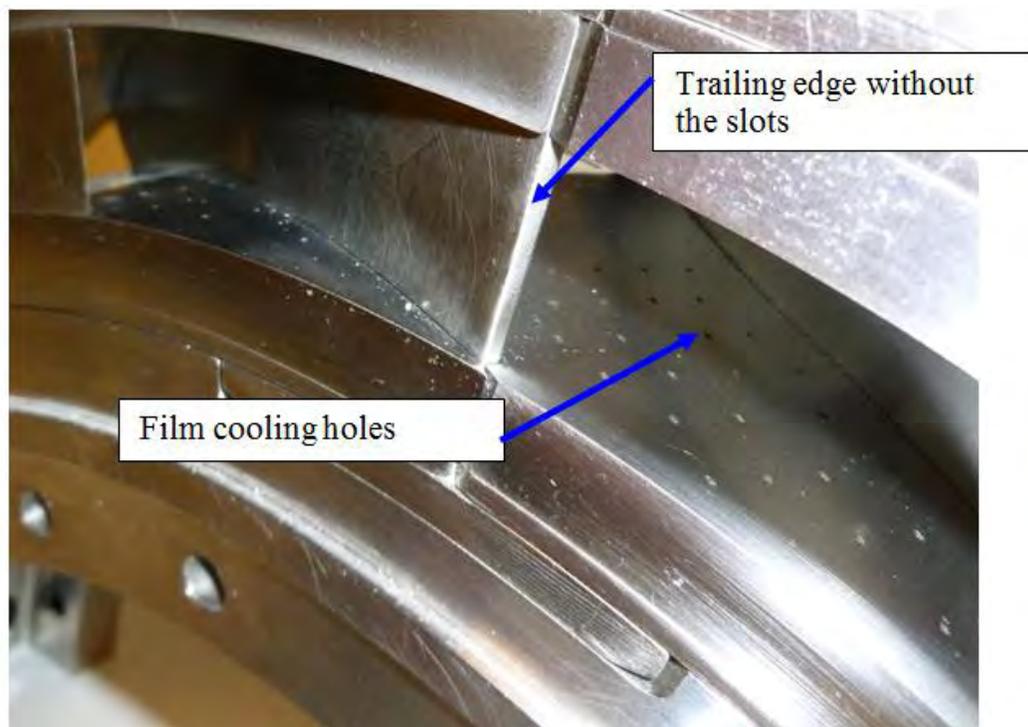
Outlet side of nozzle showing film cooling holes on hub ramp.
